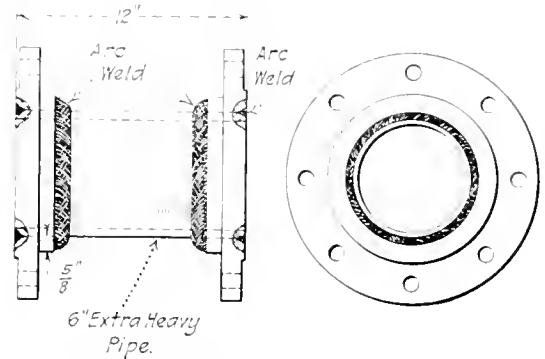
WELDING REQUIRED ON 6-IN. STEEL FLANGE
